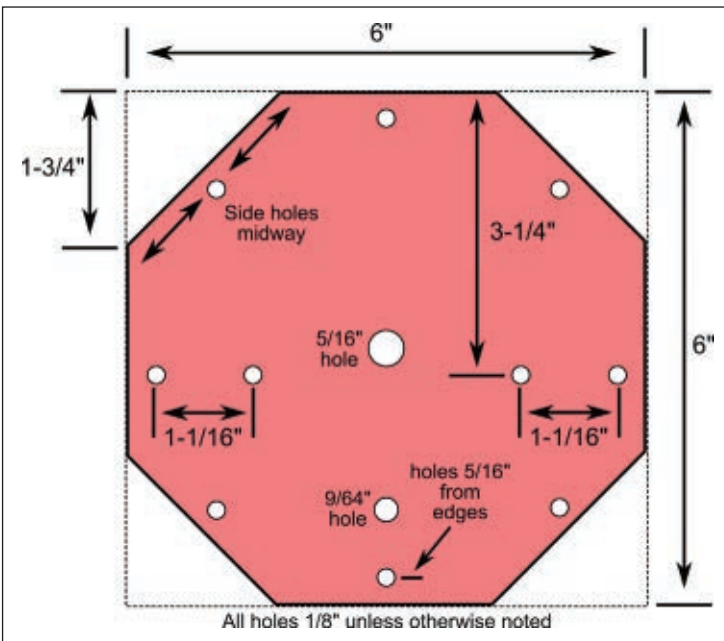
This is the cutting and drilling layout for the BeginnerBot base. Use 1/4" thick wood or plastic.
